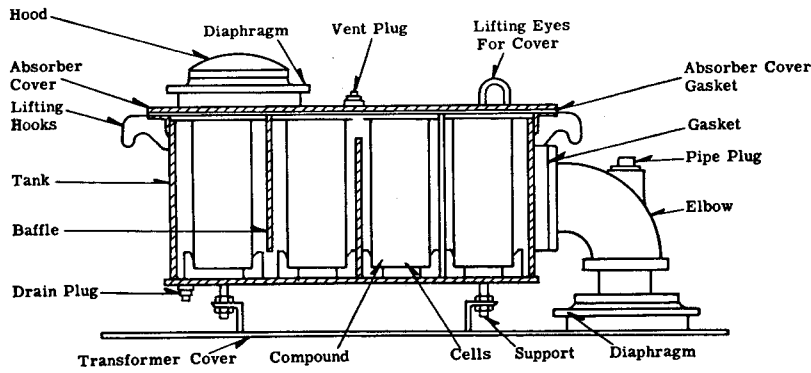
SECTIONAL VIEW OF RECTANGULAR TANK ABSORBER
